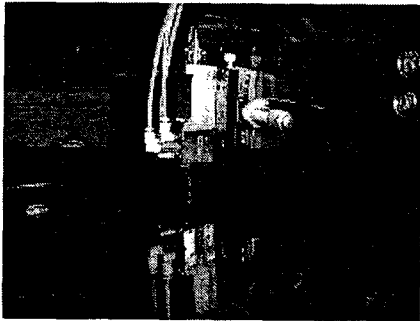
On-machine measuring of spherical mirror by using probe type measurement system
